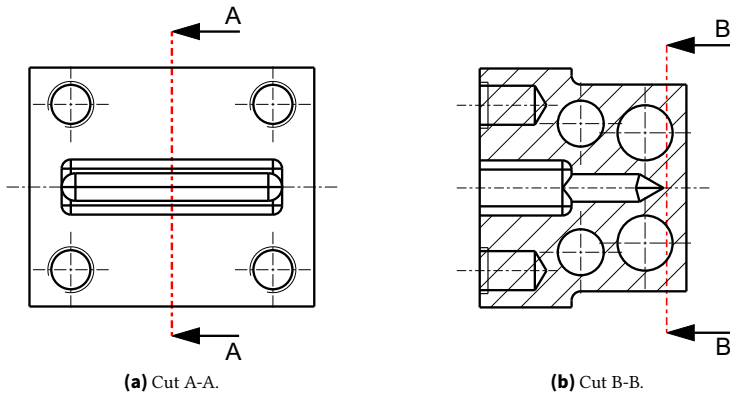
Cutting planes of the microscopic (cut A-A) and the dye penetrant (cut B-B) inspection.
